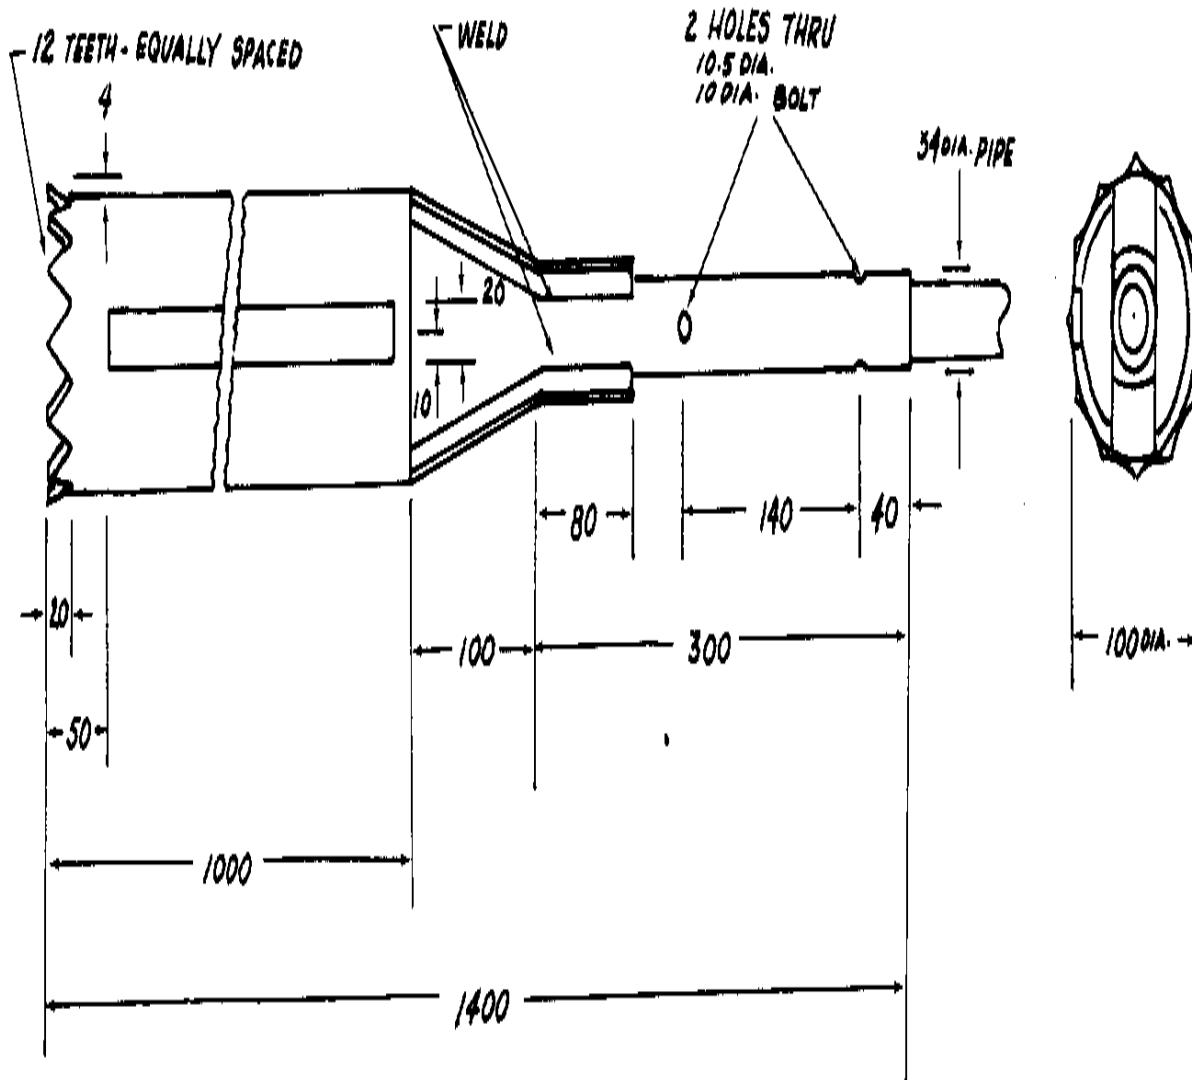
, CUTTING HEAD, WELL DRILLING AUGER
